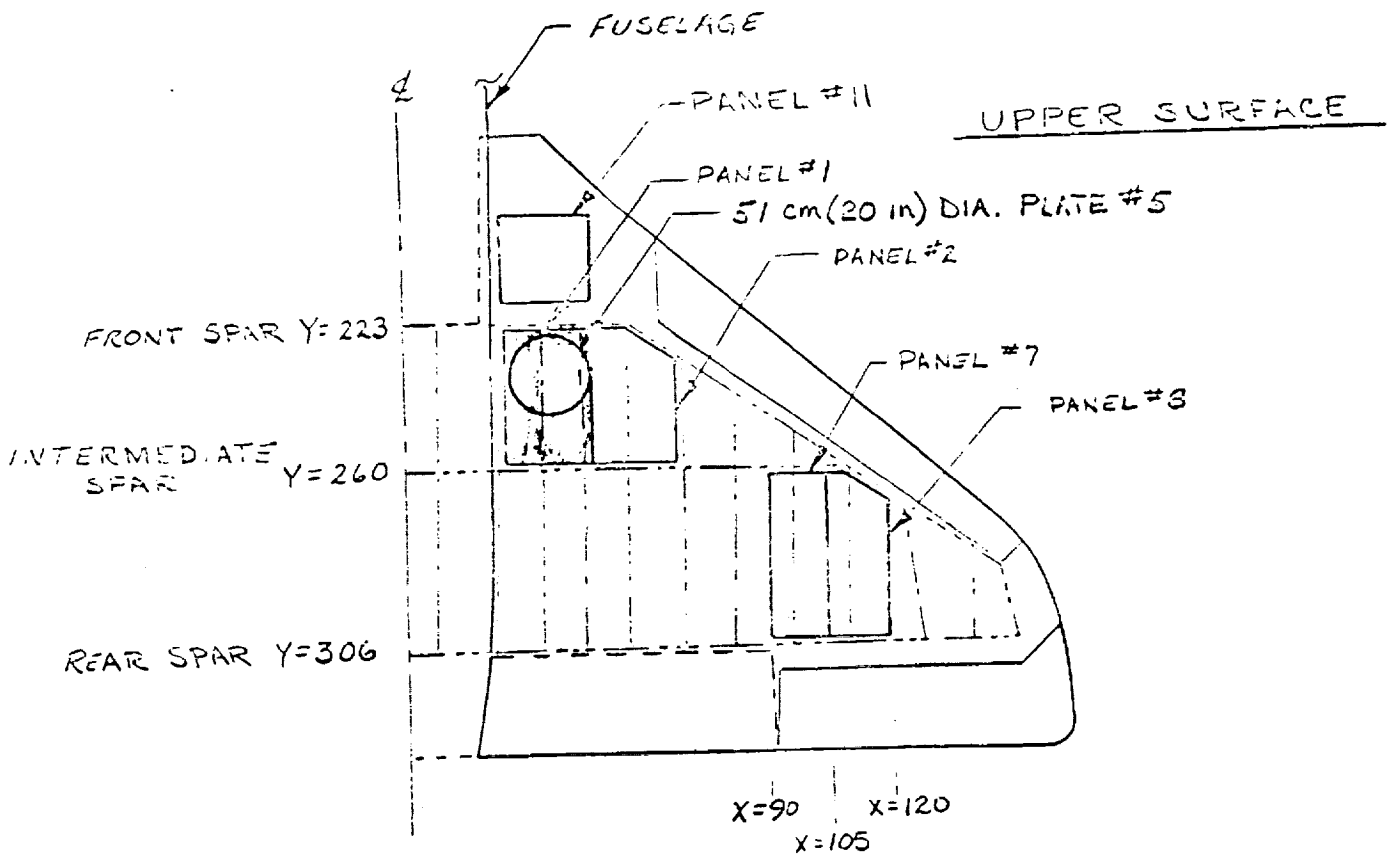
HOLE CONFIGURATION #2. PANELS 1,3,4 AND PLATES 5&6 REMOVED.
